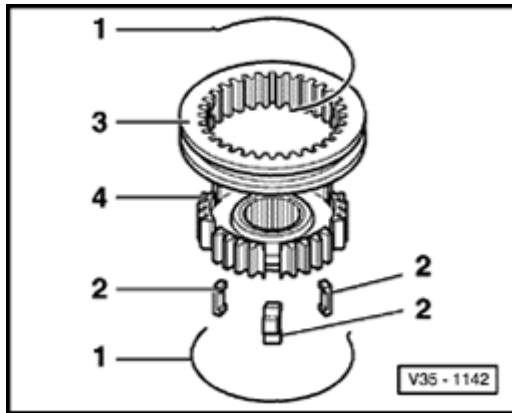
Disassembling and assembling 5th and 6th gear locking collar and synchro-hub
